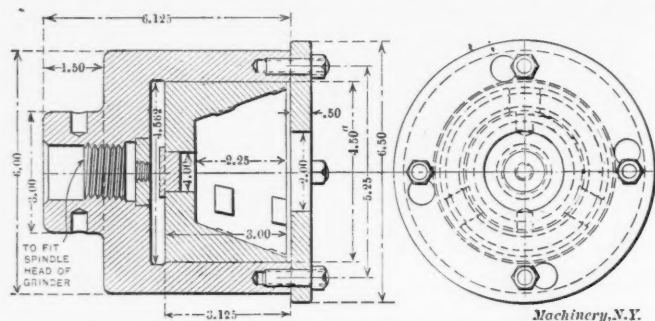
Detail of the Chuck used for Holding Bevel Gears when Grinding them, as illustrated in Fig. 15
